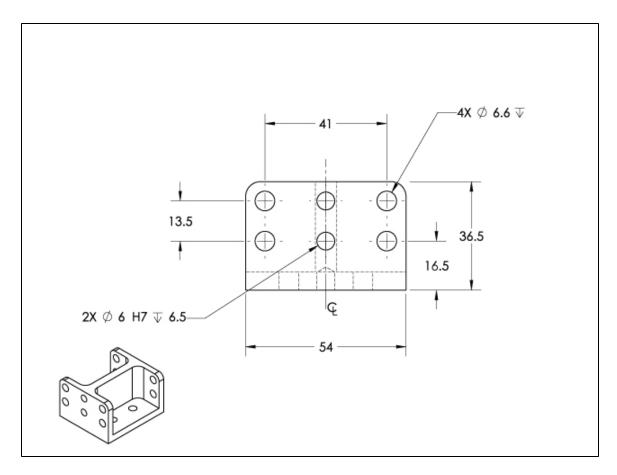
Technical dimensions for the B-005 Finger Pad Holder.
